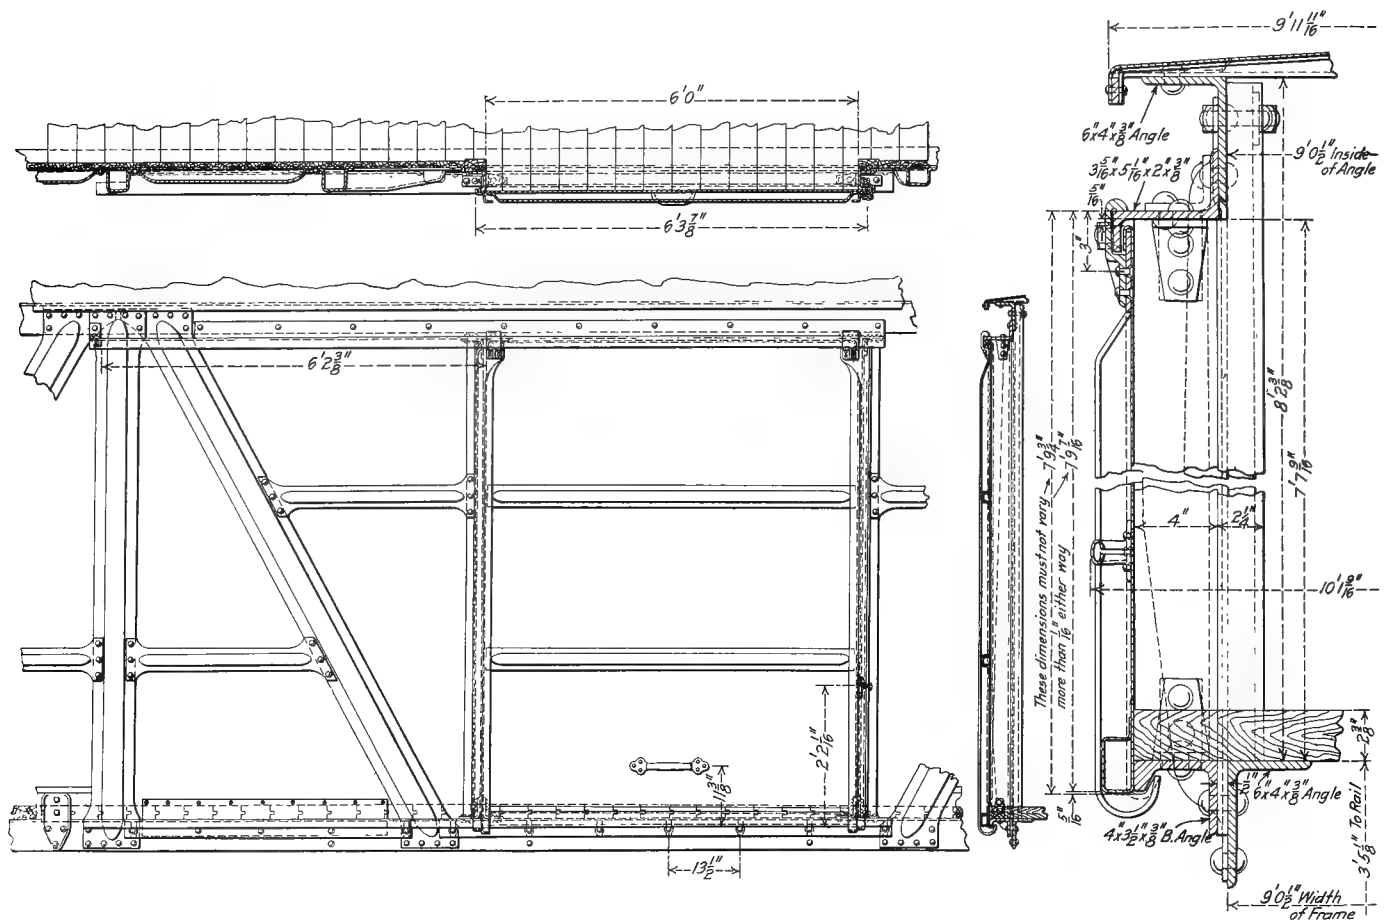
All-Steel Door Used on Pennsylvania Railroad Steel Frame Box Car.
